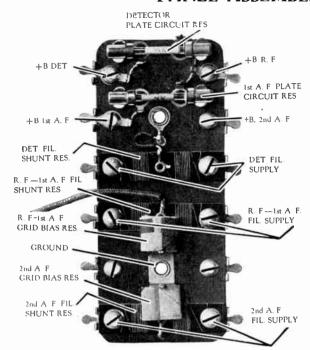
Rear View of Panel Assembly on Model 37, 37-F, 37-C, 38 and Later Type "Y" Power Units.
